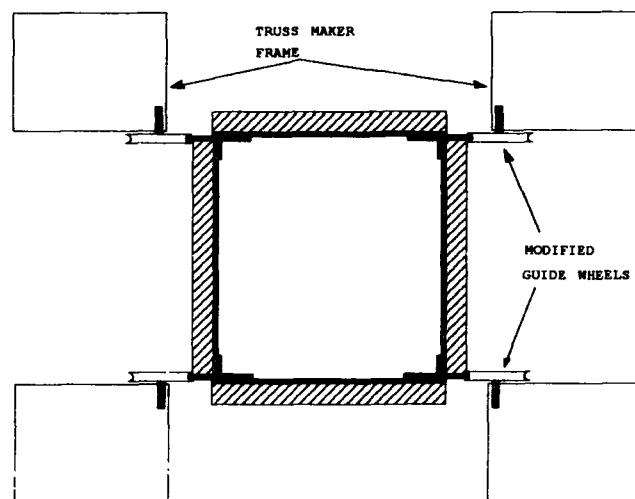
Outside guide wheels guide the truss through the SFP truss making process without interfering in the welding process.
